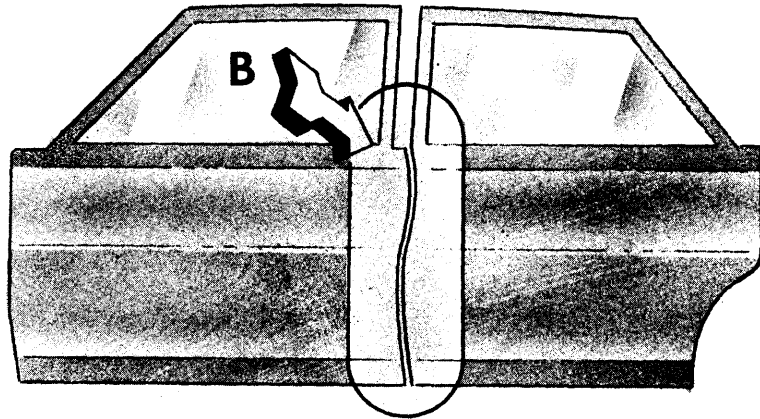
Specified Body Opening Clearance Tolerances - "A" Styles
